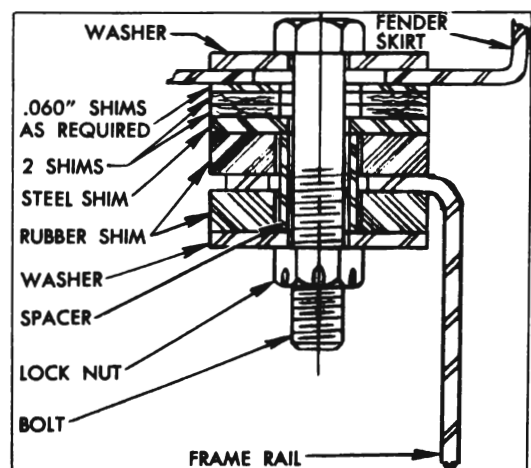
Fender Skirt Mounting Bolt and Shims
